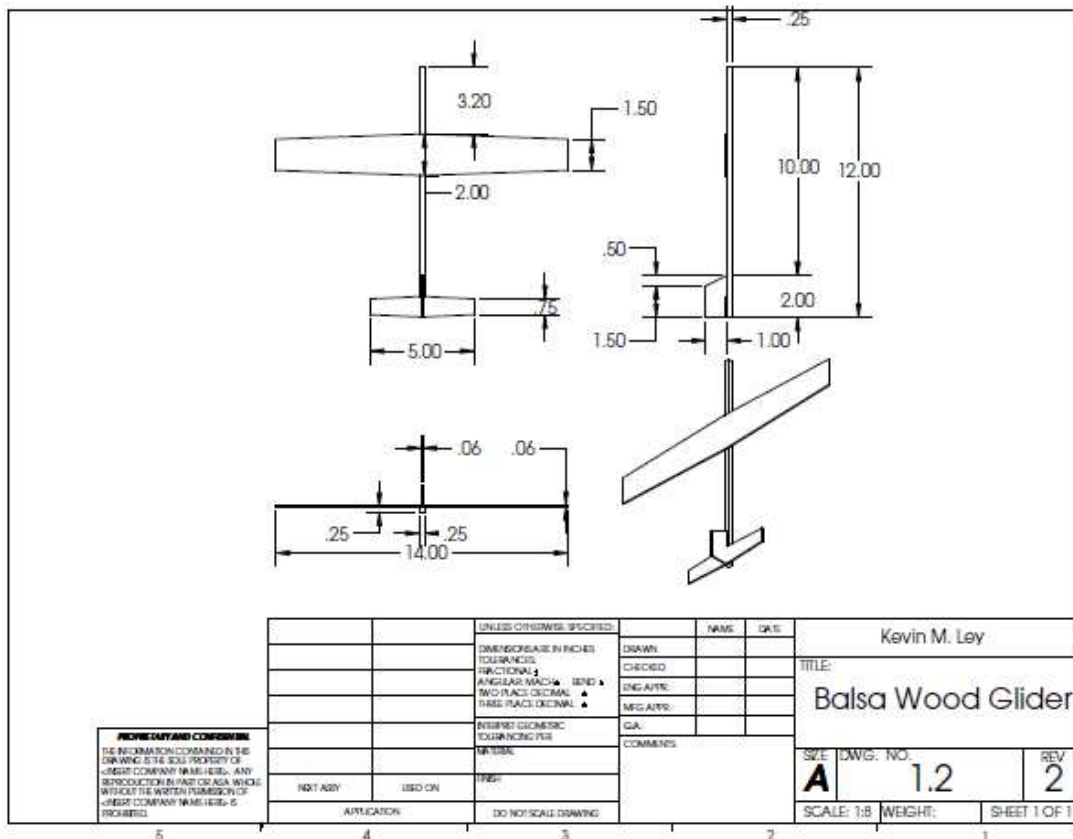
CAD Drawing Balsa Wood Glider Revision 1.2
